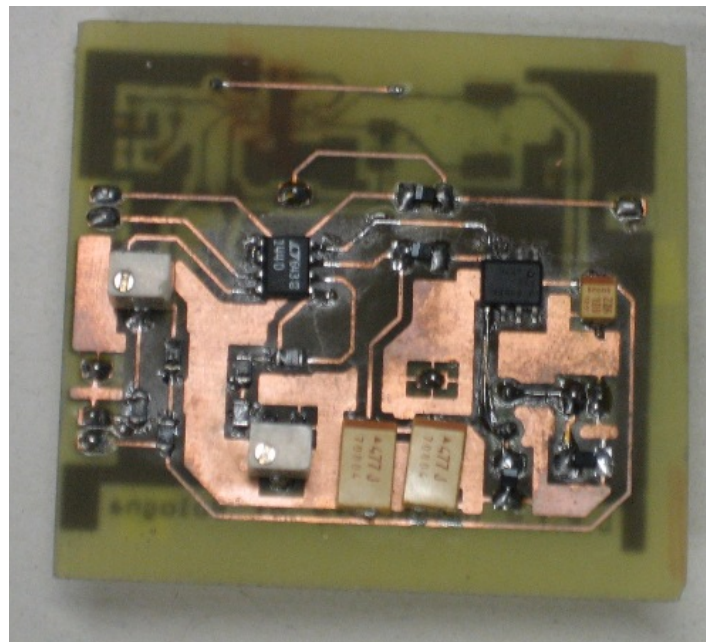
Bottom layer of the Bologna scavenger PCB.
